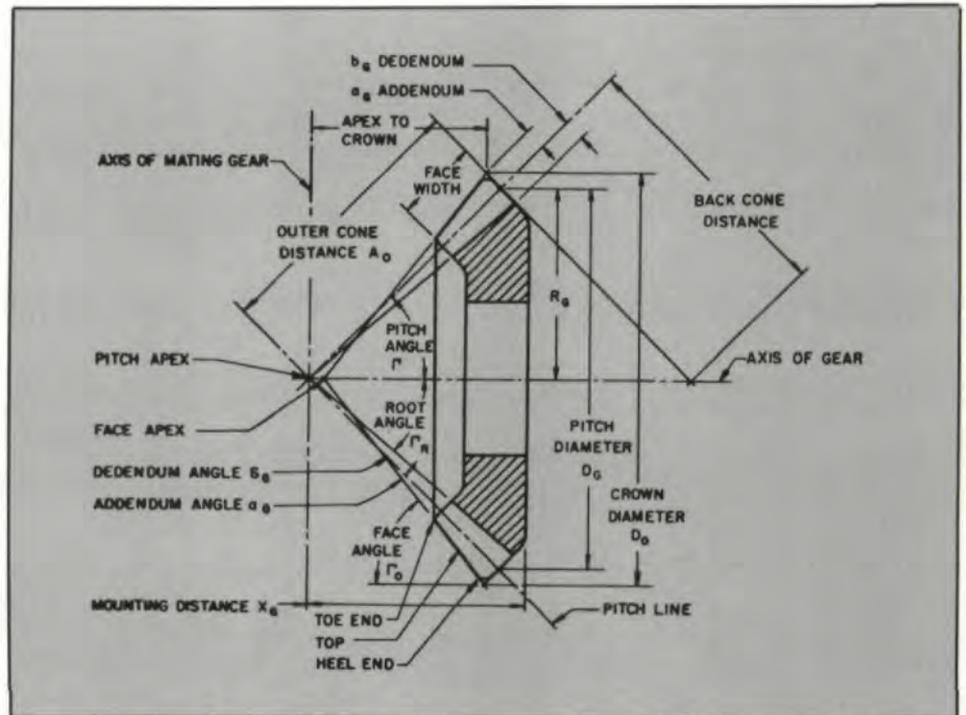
Nomenclature for bevel gears. (Courtesy General Motors Corporation.)
